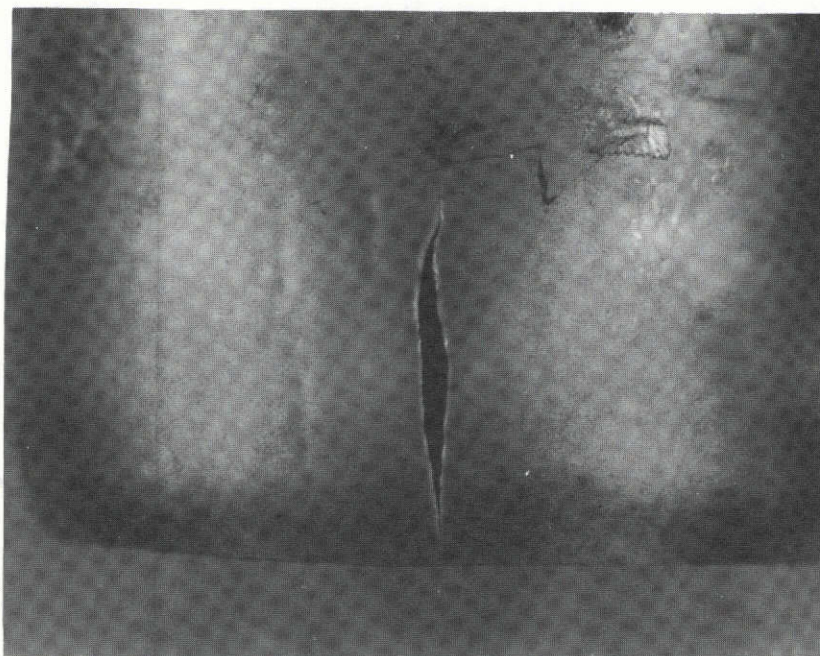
Fracture Surface of Cylinder No. 10
